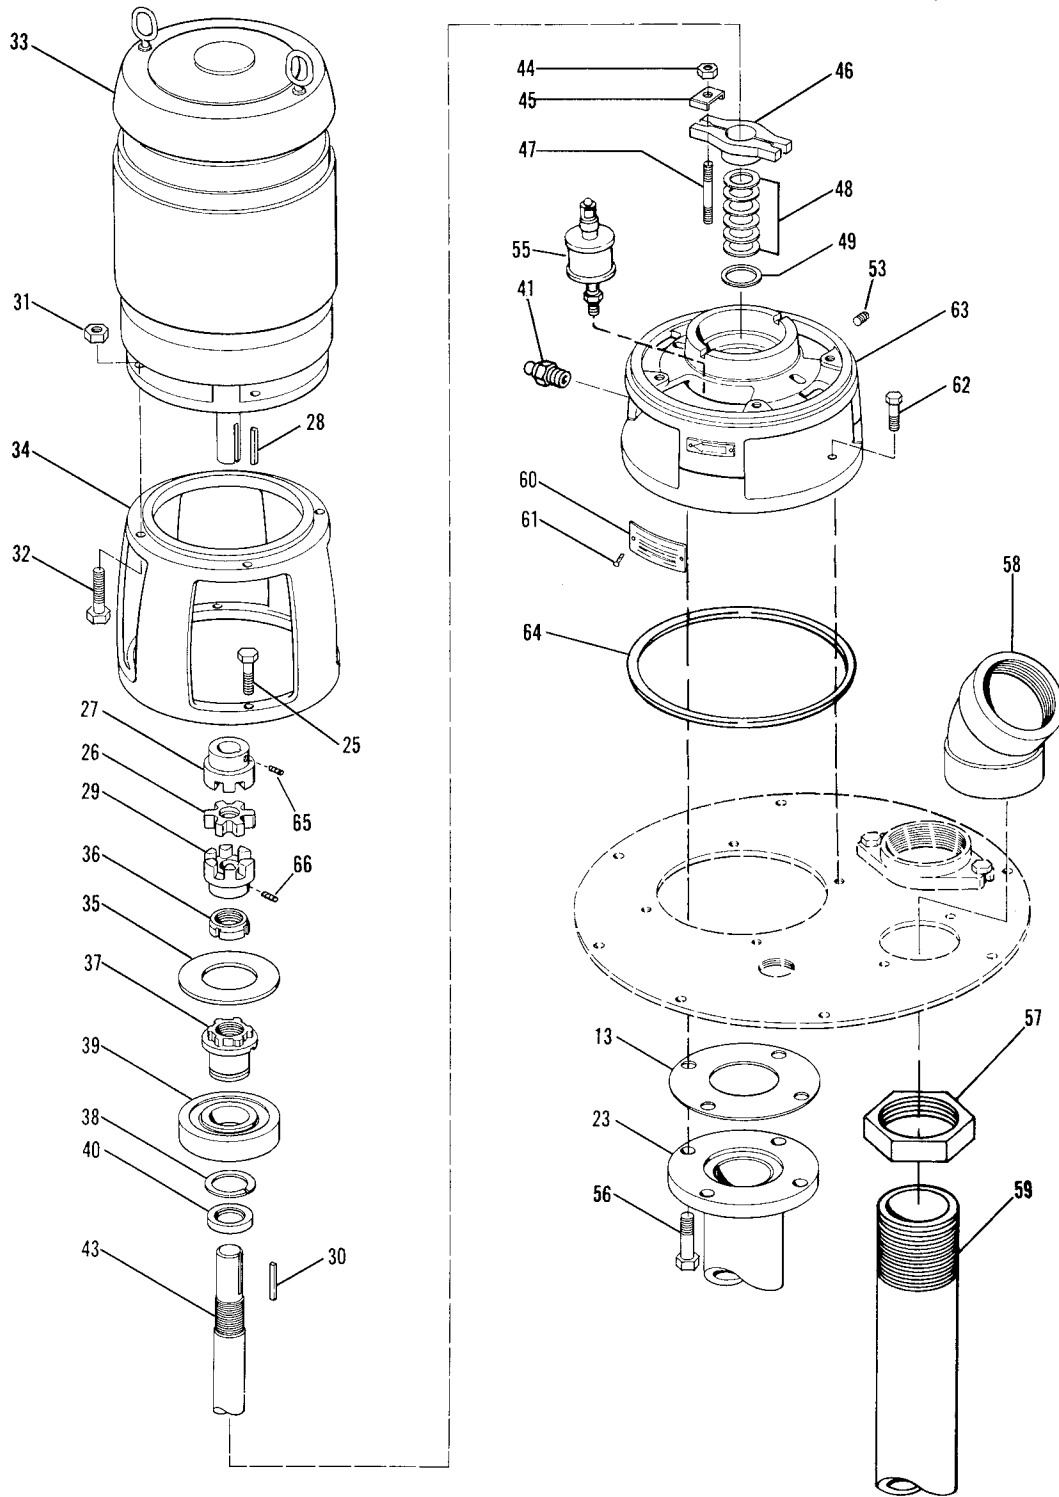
Model 631-632 Exploded View (Sheet 1 of 3)
